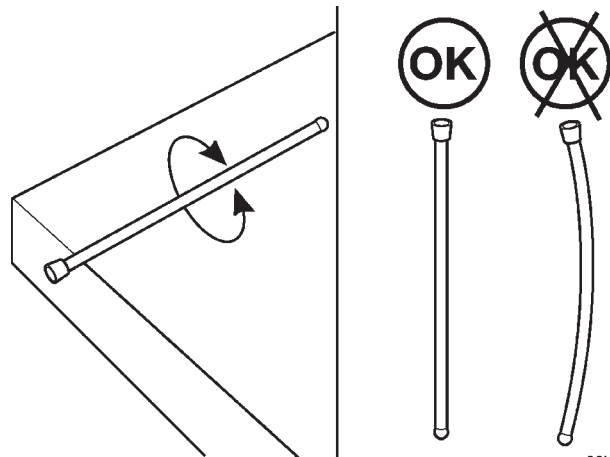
Measuring Rocker Arm ShaftROCKER ARM SHAFT (MIN.)
